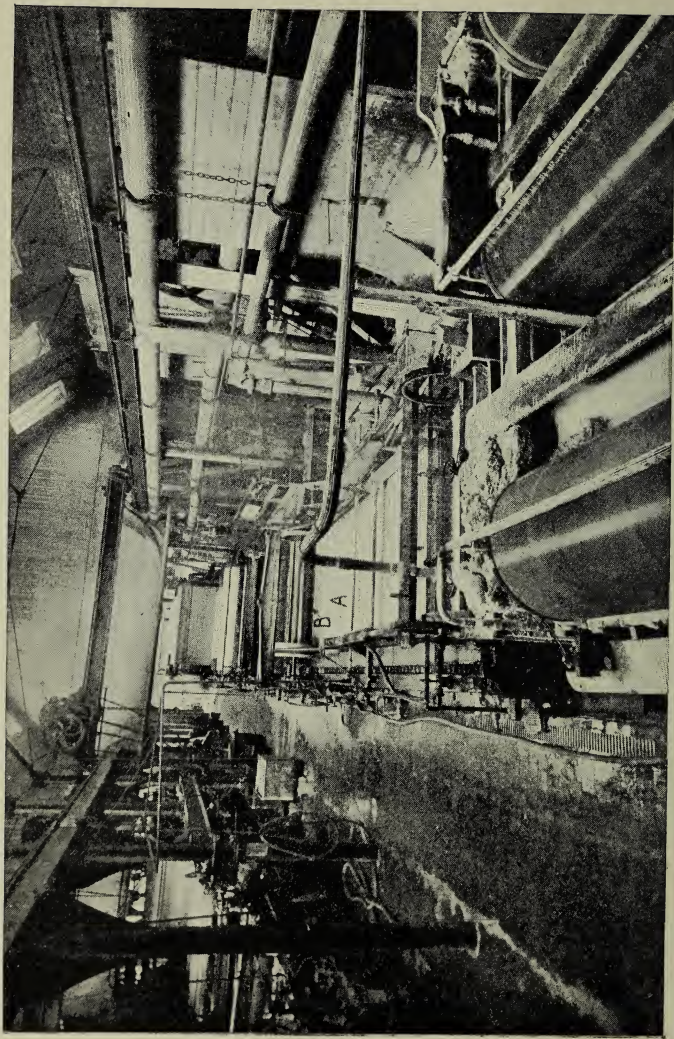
Another view of the “wet end” of a Paper-making Machine.—A is the sheet of half-drained pulp, passing on to B, the “dandy” roller.
